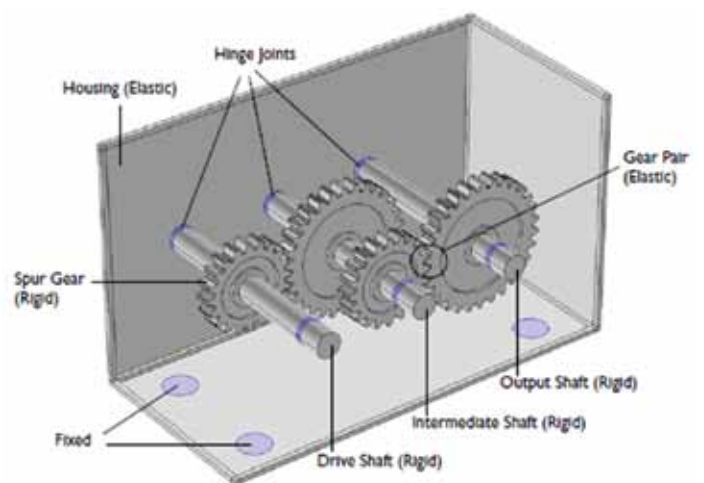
Model Geometry of the Gearbox Where the Fixed and Hinged Locations are Highlighted
